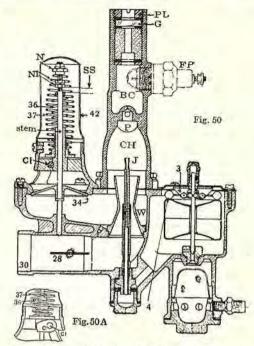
Sectional side view of the Packard carburetor and fuelizer used on the six-cylinder engines on cars, models 126–333.
